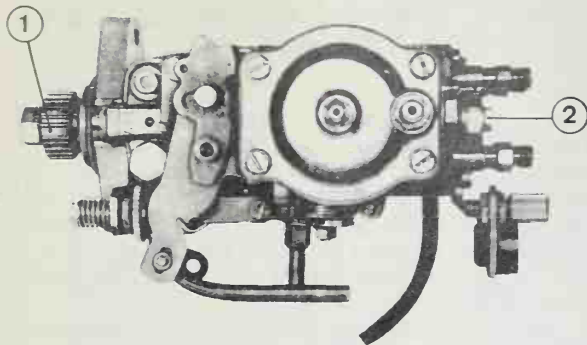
View of Bosch fuel injection pump. Note drive gear master spline (1).
